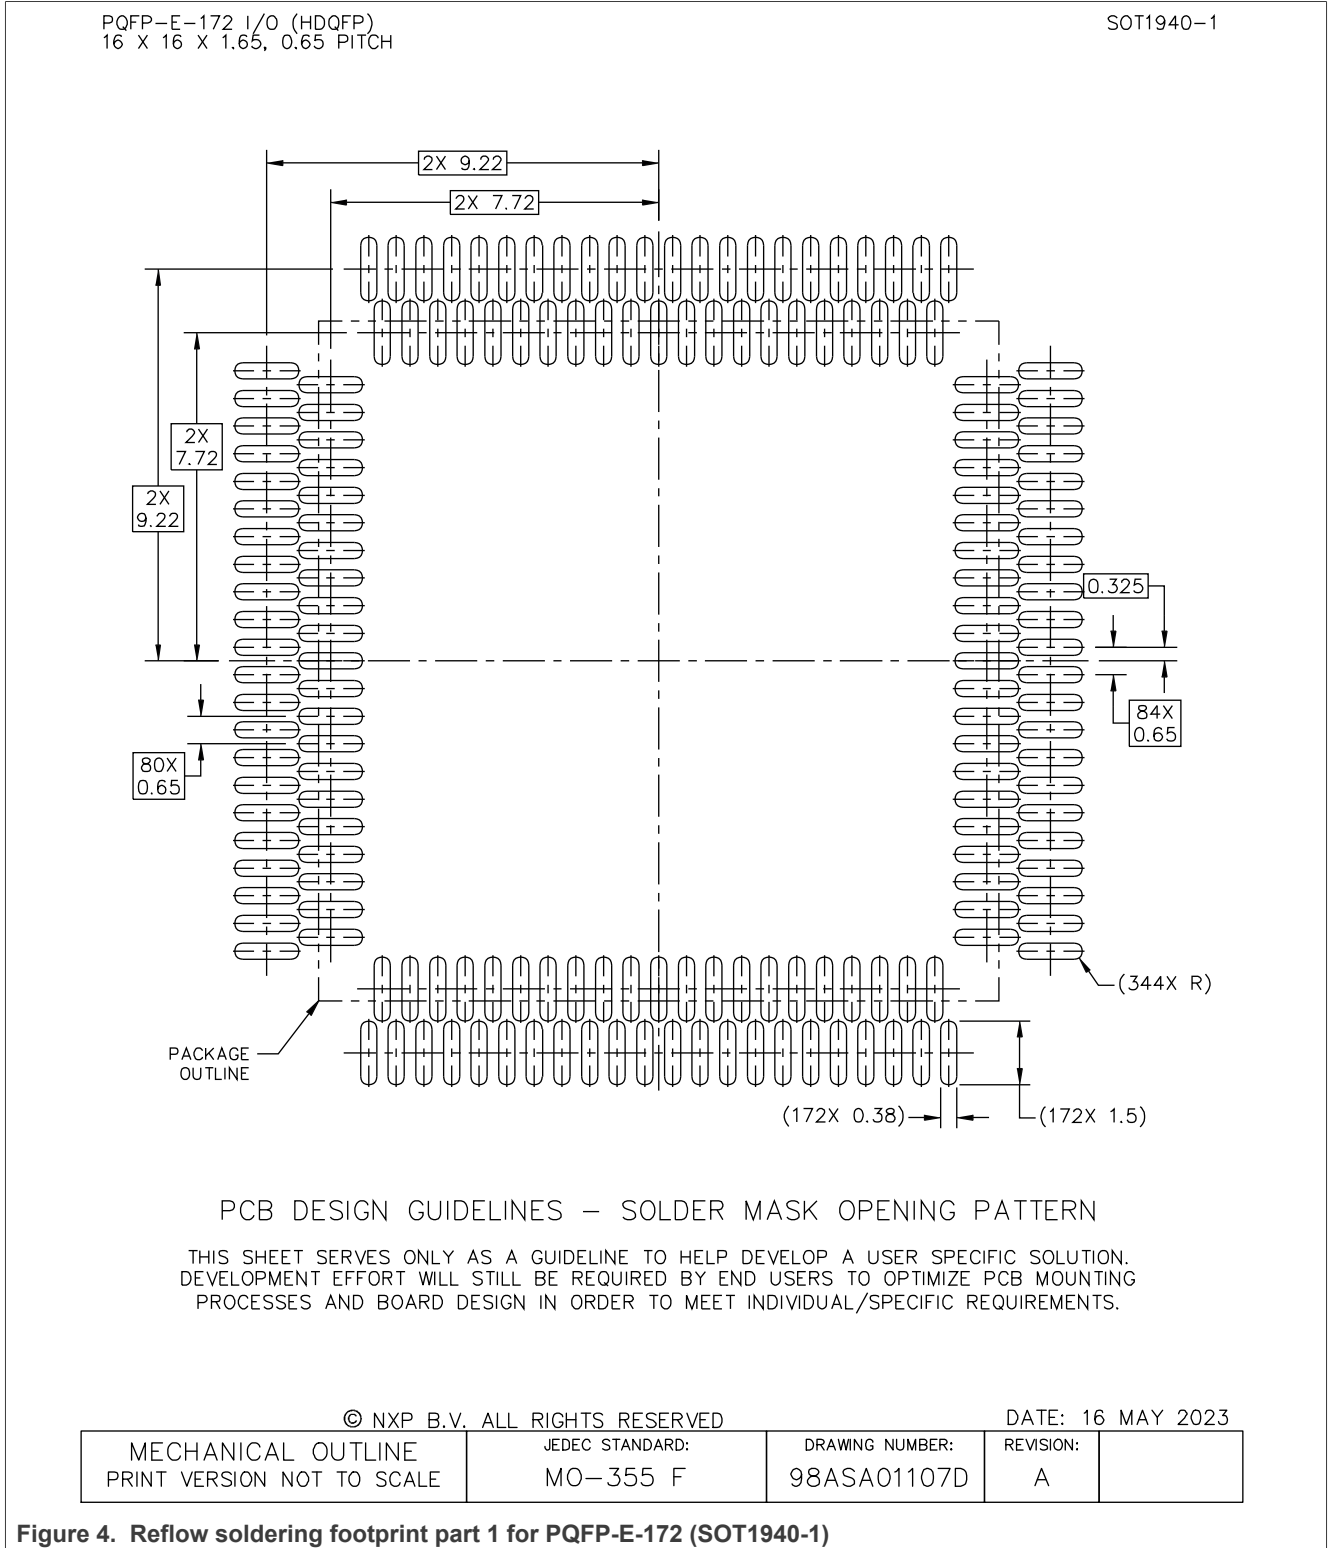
Reflow soldering footprint part 1 for PQFP-E-172 (SOT1940-1)
